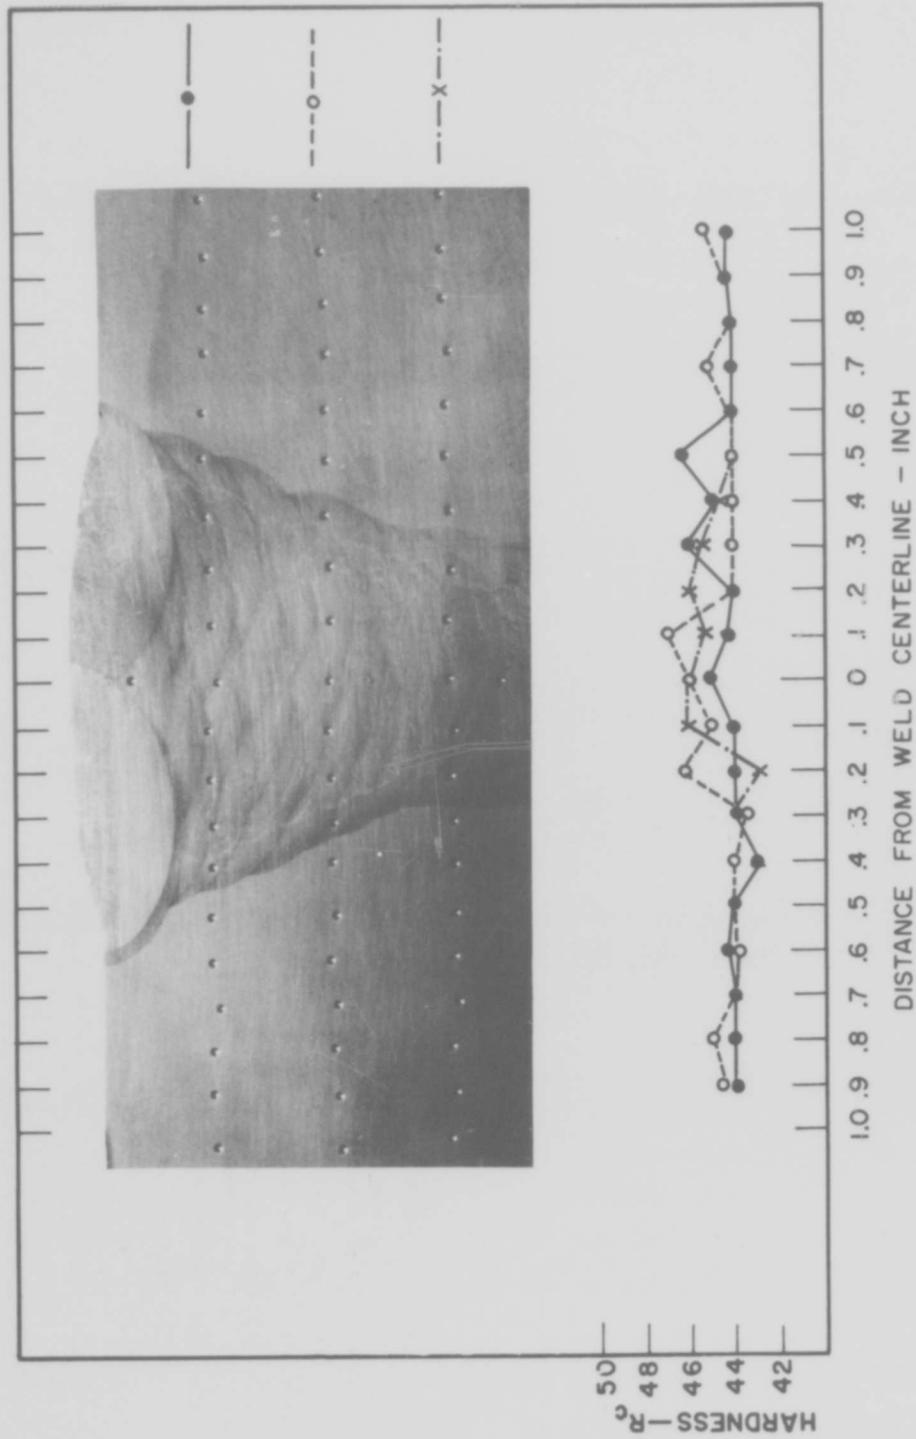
Hardness Survey of Multipass TIG Weld No. M291 Made in HP 9-4-25 1-Inch Plate. Weld was Made in Helium at 10 ipm Using Filler Wire No. 19 and a Single U-Groove Joint Design.
